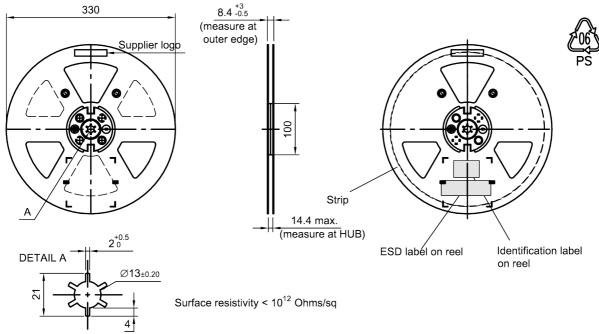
Drawing of reel (first-angle projection) with diameter of 330 mm.
